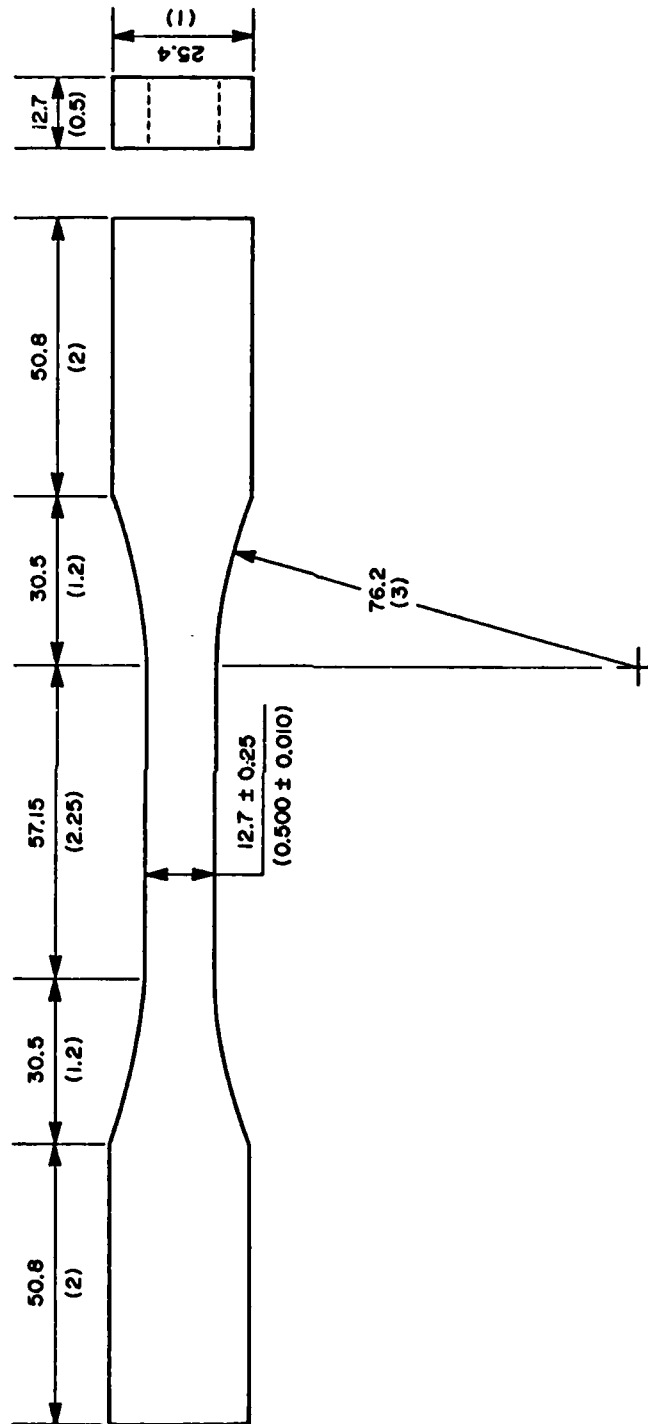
"Dogbone" Tensile Specimen [dimensions in mm (in.)].
